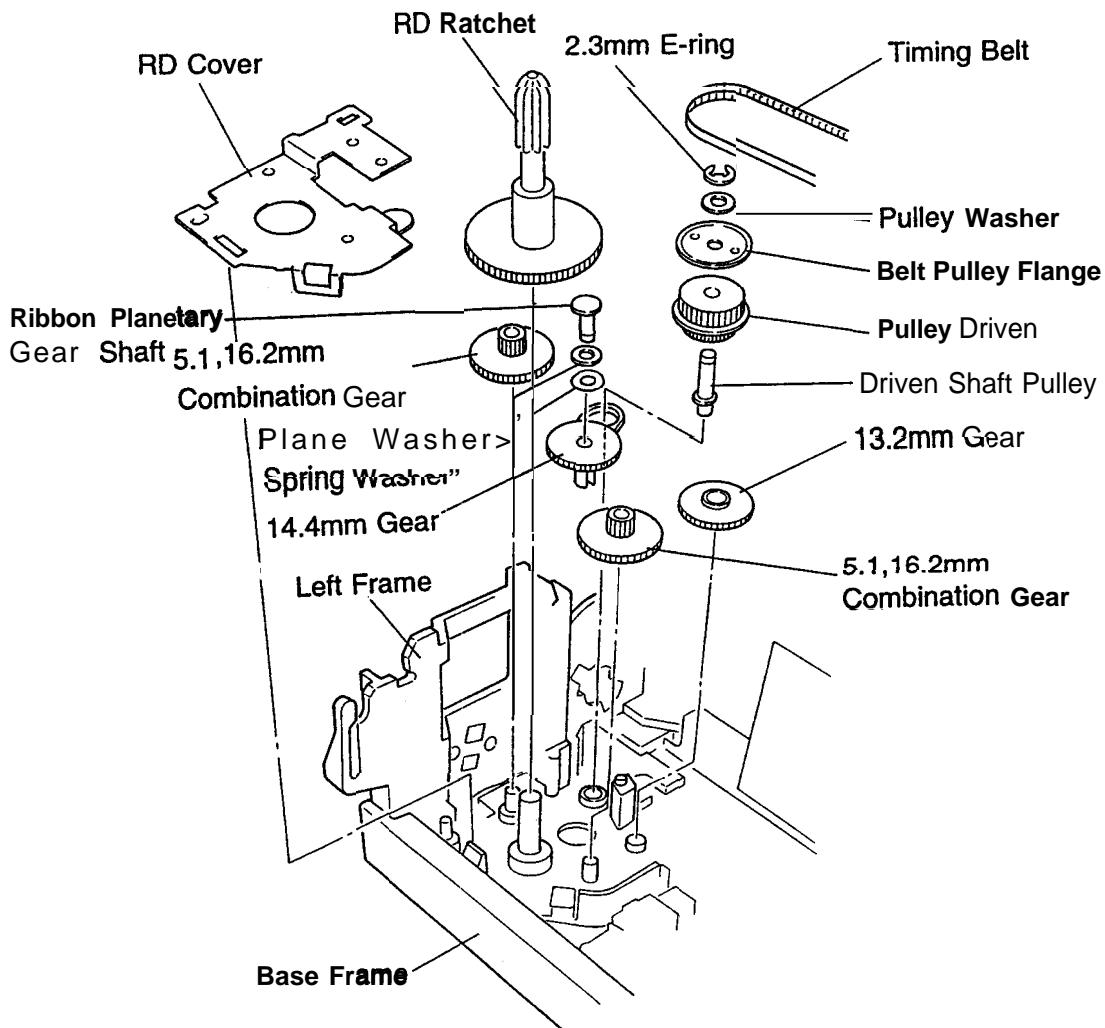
Removing the Ribbon Drive Gear Assembly
